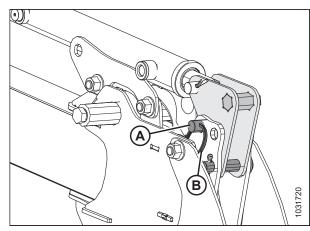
Fore-Aft Cylinder Adjustment Type 1 – Aft Position
